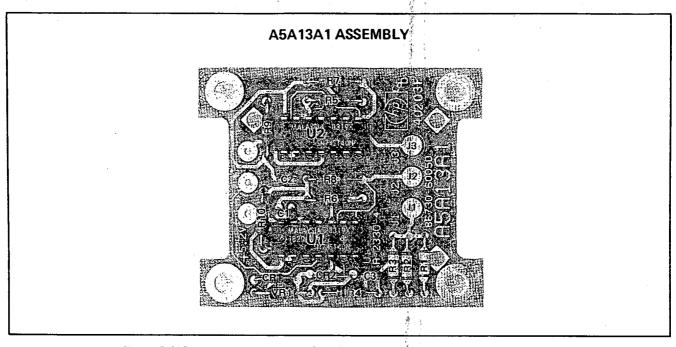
A5A13A1 Pulse Input Switch Board Assembly Component Location
